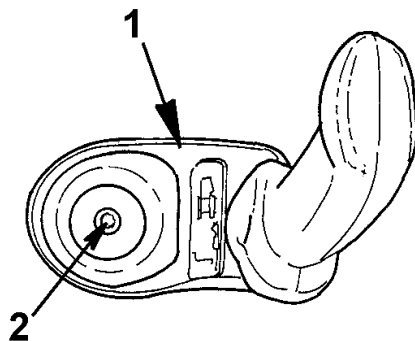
Brake and Shroud, Top View (Tall Brake Assembly Shown)
